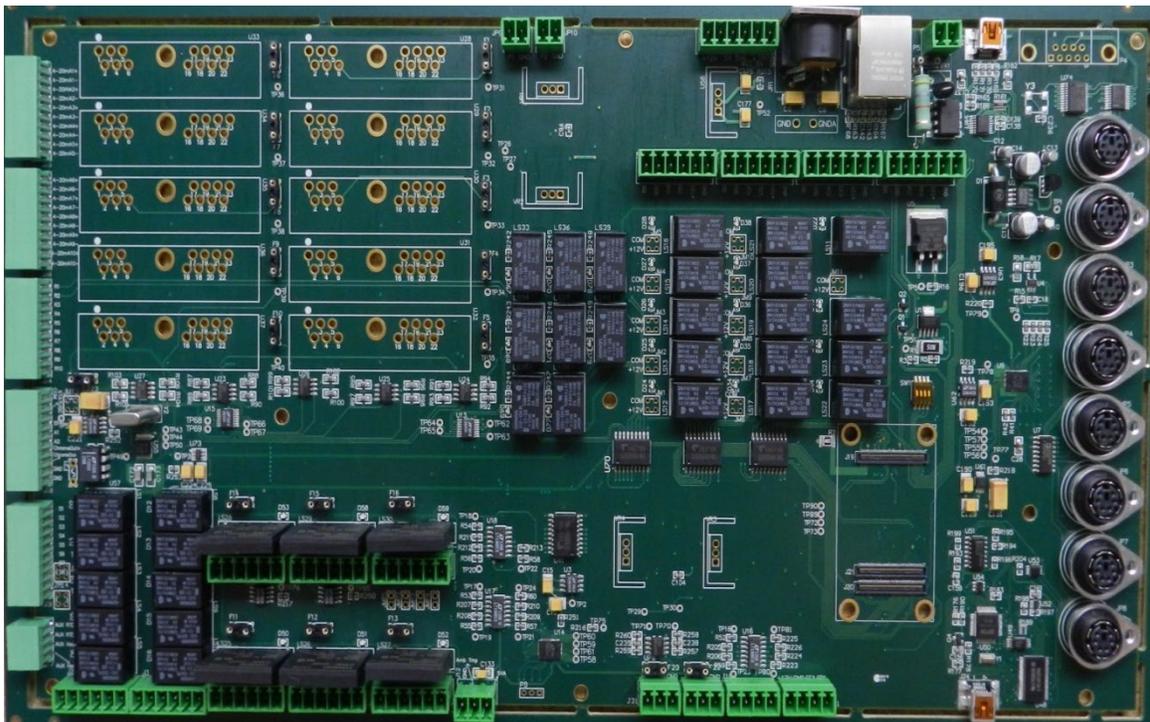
MultiDetek 2 printed circuit board (PCB)
